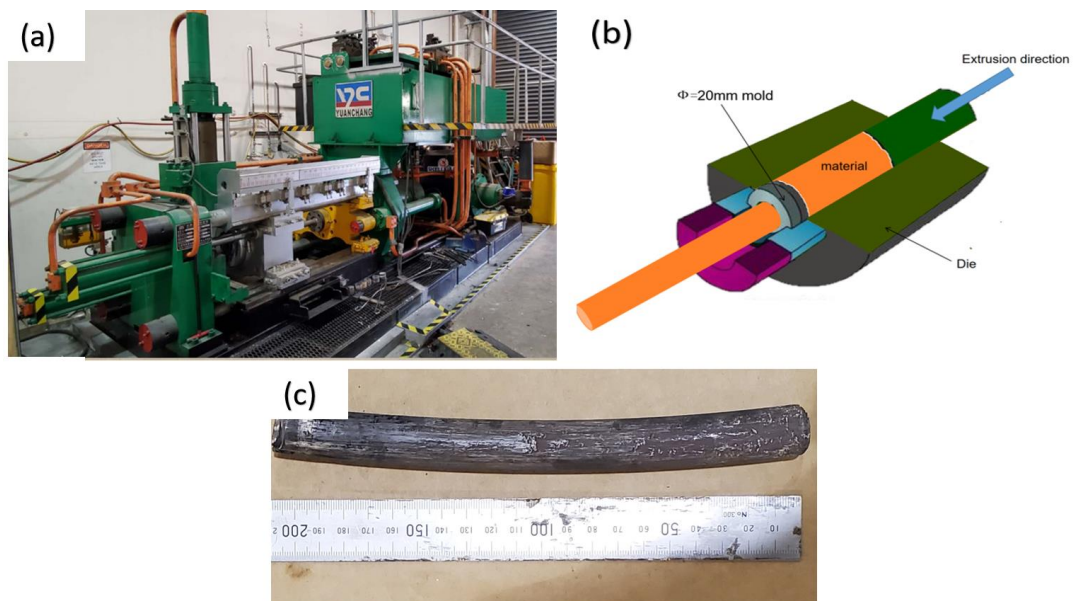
(a) extrusion molding machine (Wuxi Yuanchang Machinery 300-ton press); (b) extrusion schematic; (c) extruded swarf Ti-6Al-4V matrix composite
